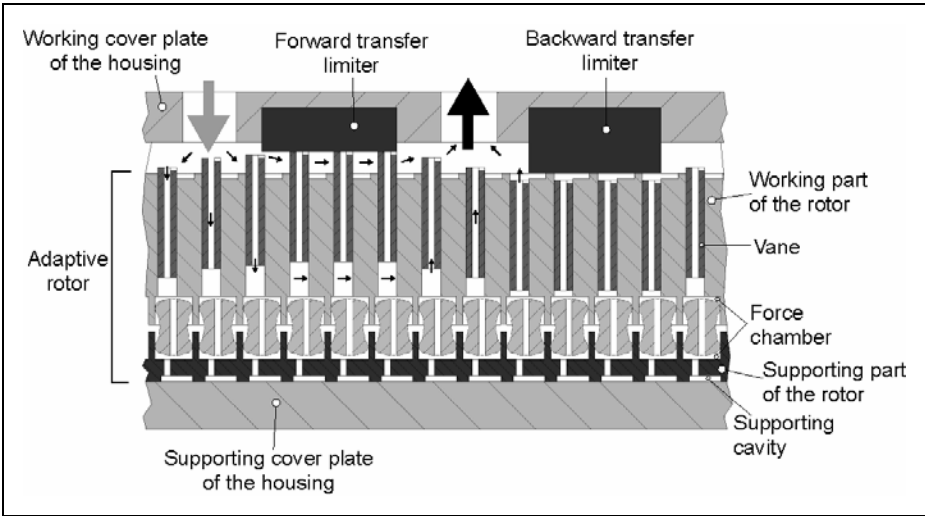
Vane-In-Groove pump with Adaptive Rotor – circular development along the annular groove
